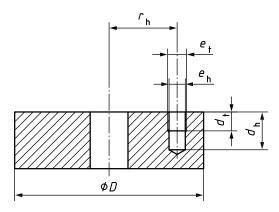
Geometrical dimensions for unbalance holes in type 1 straight test wheels
